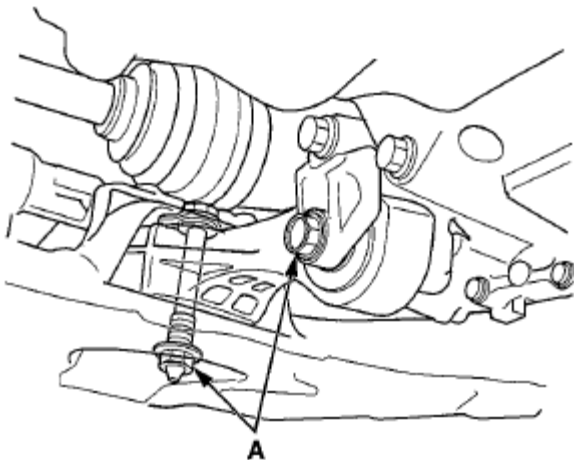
Identifying Engine Mount/Bracket, Assembly Mounting Bolts With Torque Specifications
